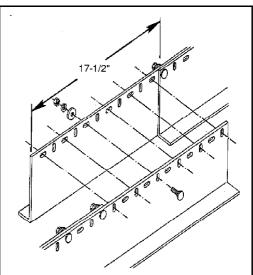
(MSIND417AE) Support Rail to Support Rail Connection
